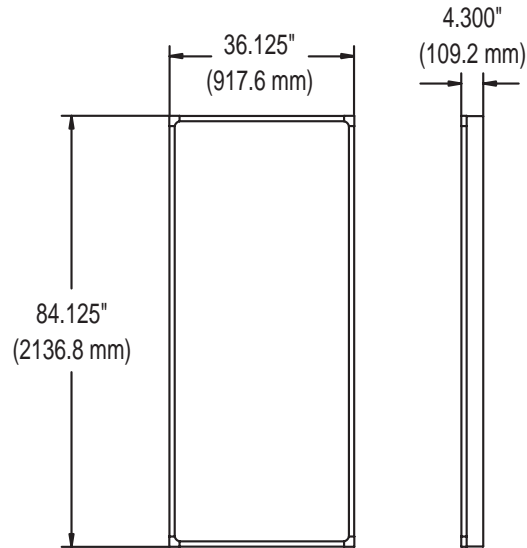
KOZI Solar Hot Air Collector Dimensions
